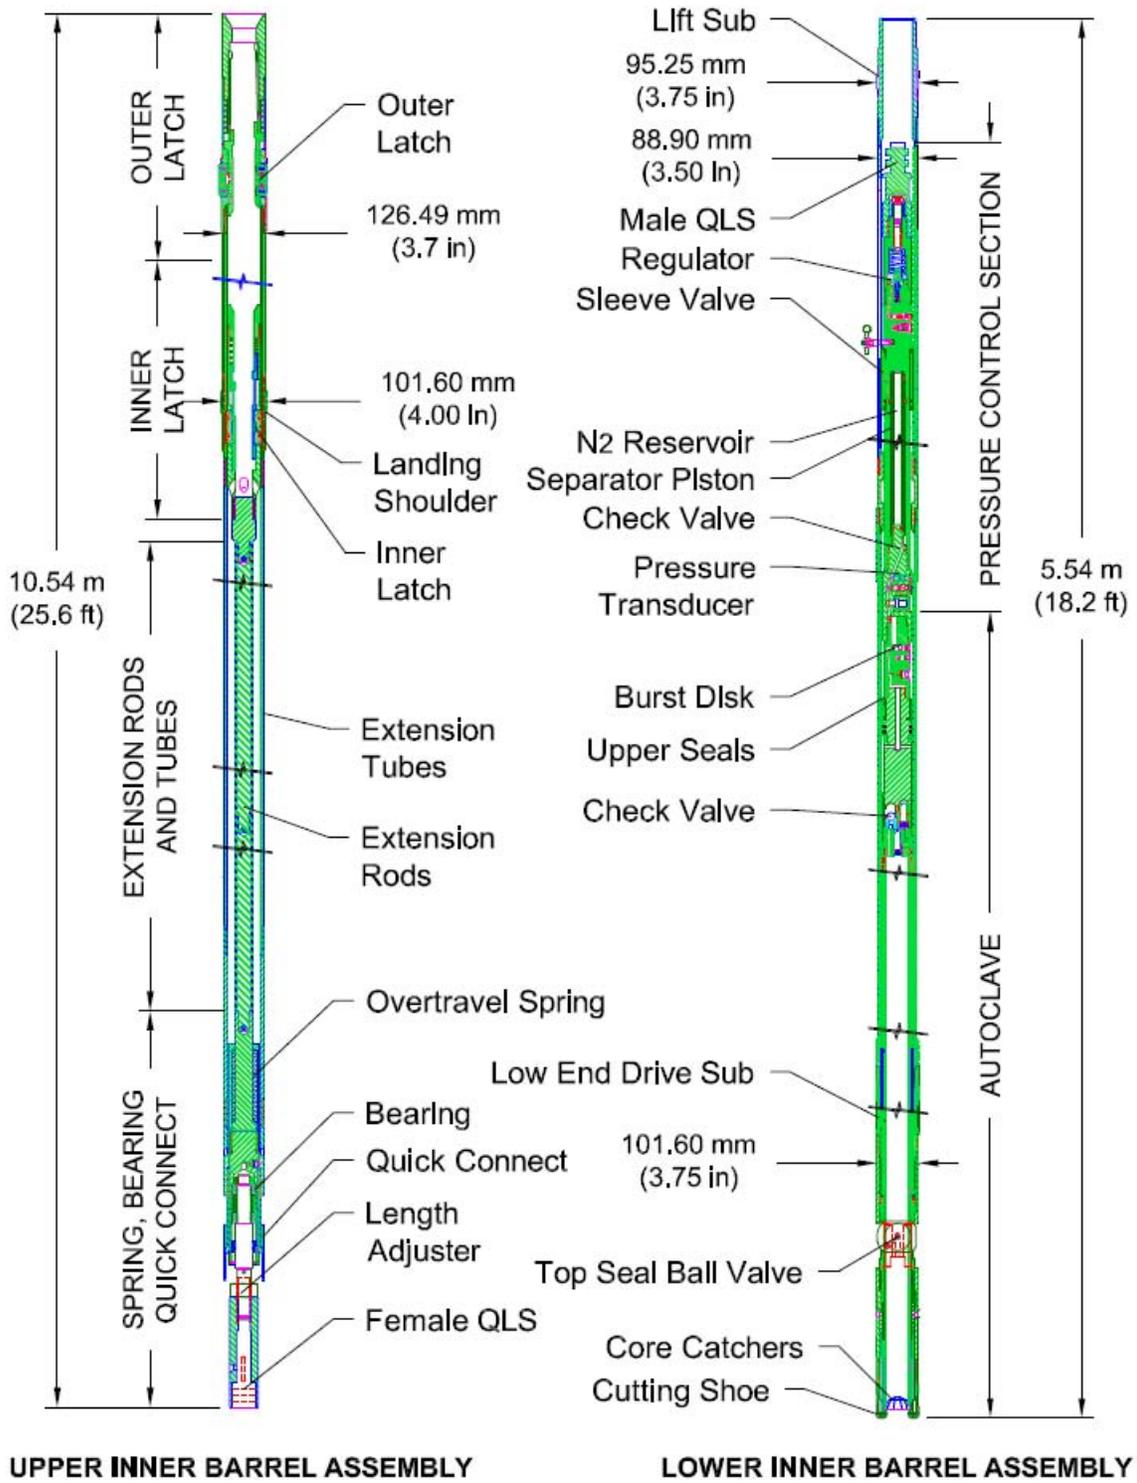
, Overview of the Original Hybrid PCS Inner Barrel Assembly
